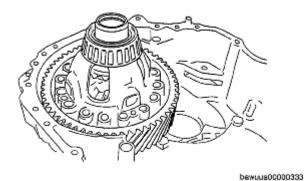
Identifying Counter Gear Component Courtesy of MAZDA MOTORS CORP.
